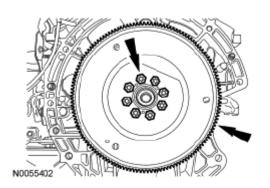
Locating Flexplate Bolts Courtesy of FORD MOTOR CO.
